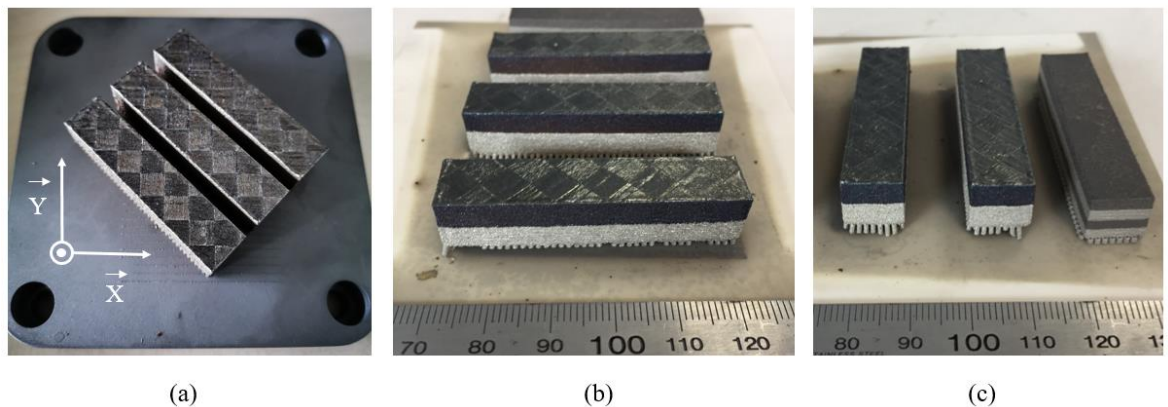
Bend bars a) on building plate, b) Bi-layer specimen lateral view, c) front view including 4-layers specimen
